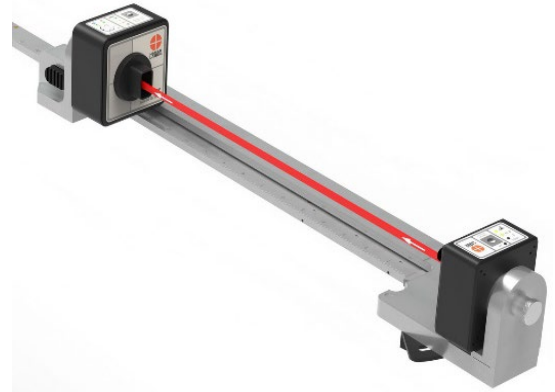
A-703SP-LM Surface-Plate Mounting Fixture
